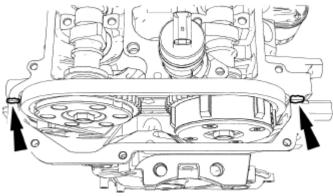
Locating Engine Plug Bolt Courtesy of FORD MOTOR CO.
